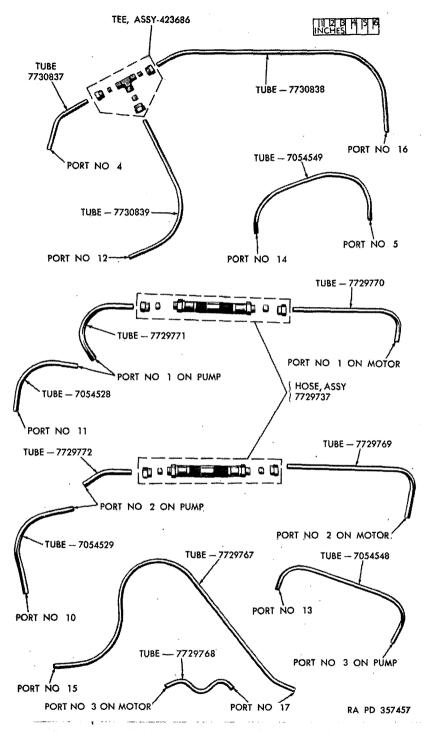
Hydraulic turret traversing tubes, hoses, and fittings.
